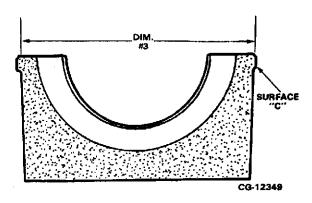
Dimension No. 3 (Bearing Cap Width)
